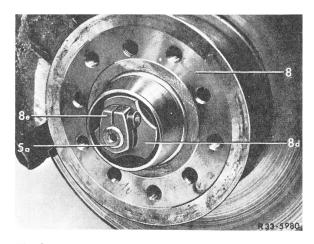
5a Steering knuckle spindle 8 Front wheel hub
